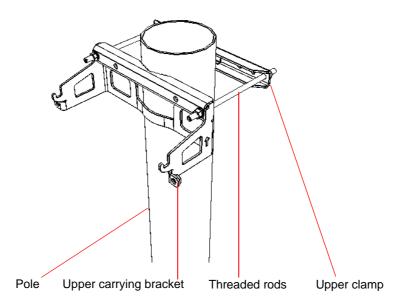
Assembling Upper Carrying Bracket and Clamp on the Pole
